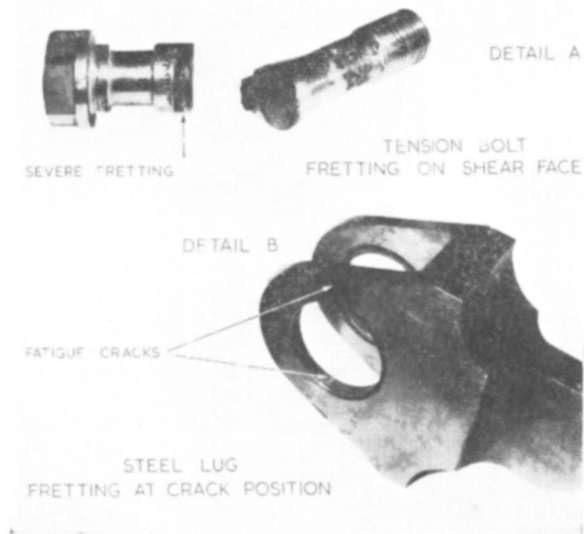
Typical Example of Fretting Failures (Lugs-Bolts)
